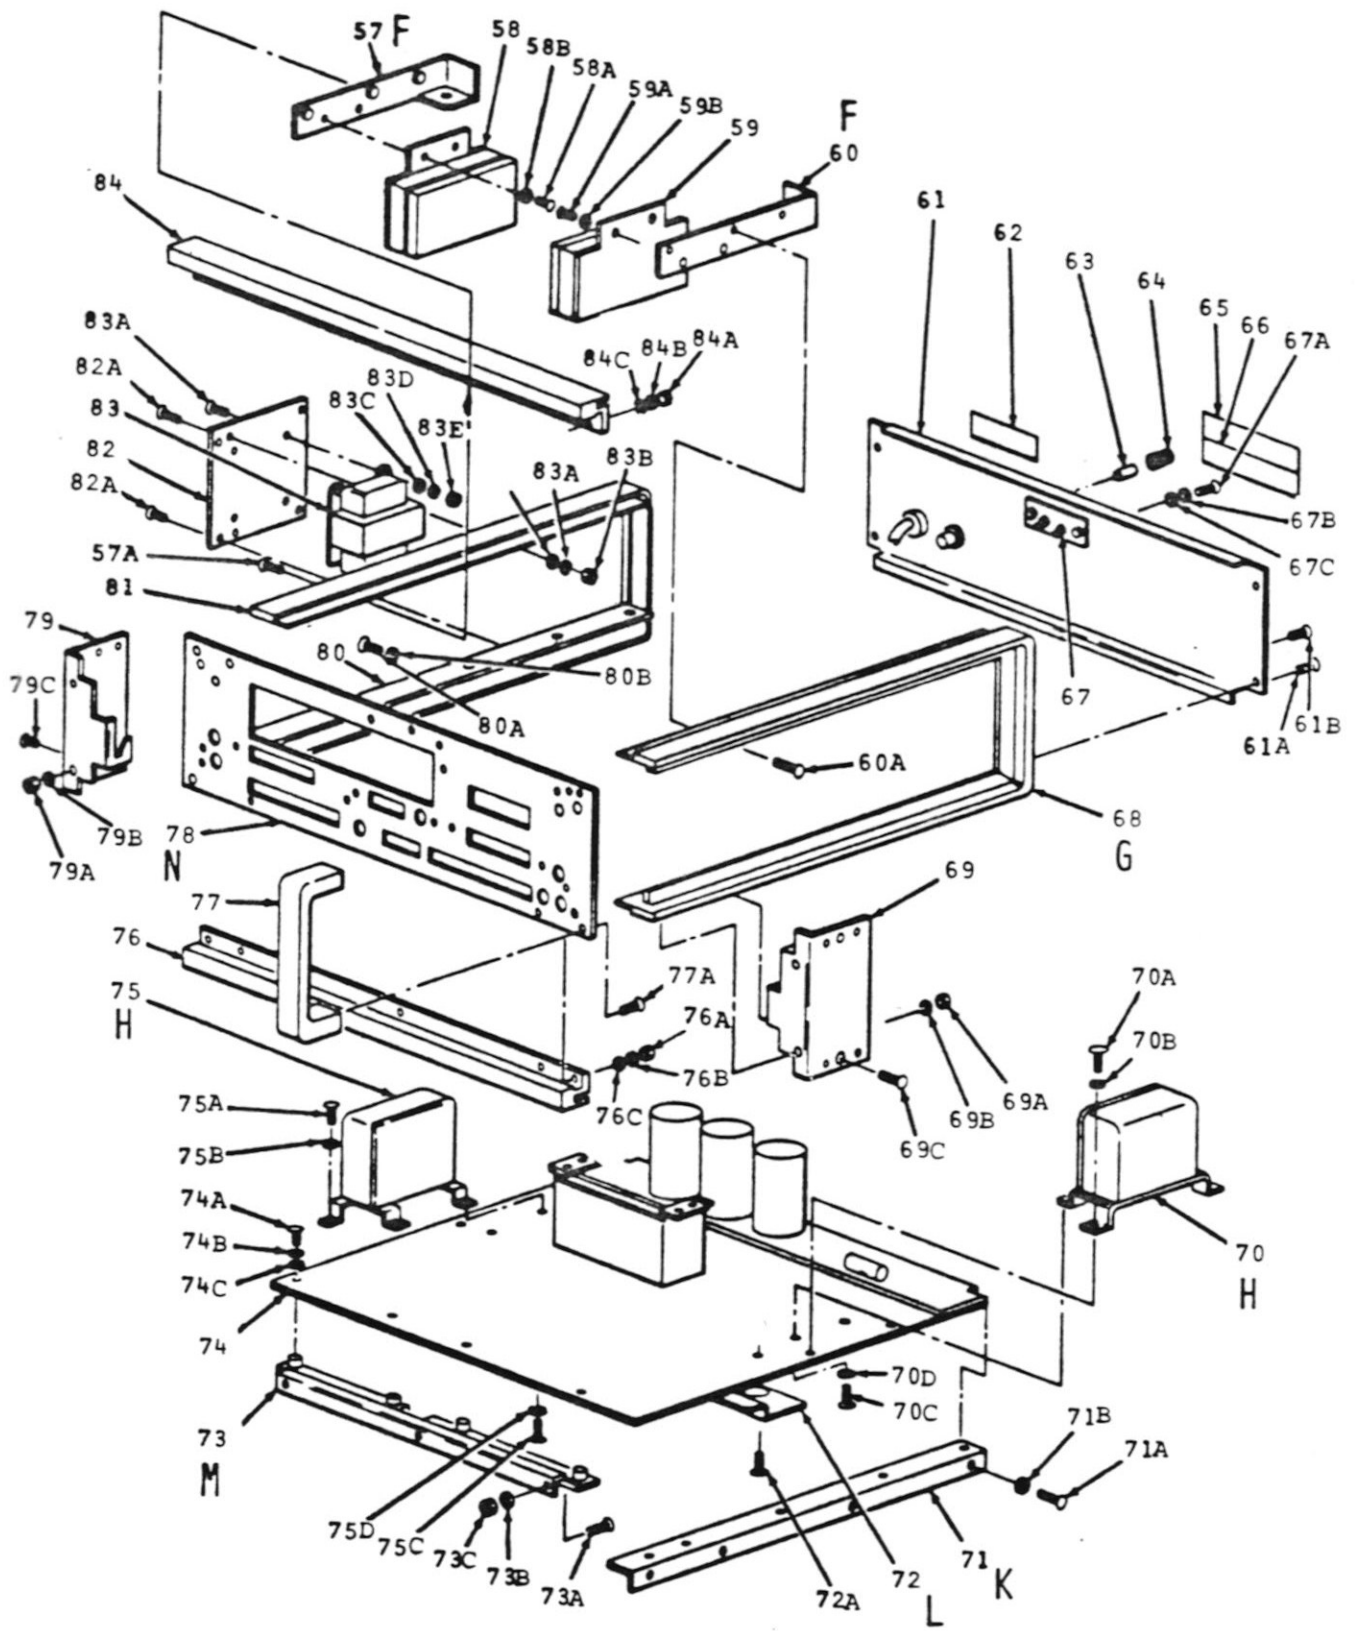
DPAV Exploded View (Sheet 3 of 5)
